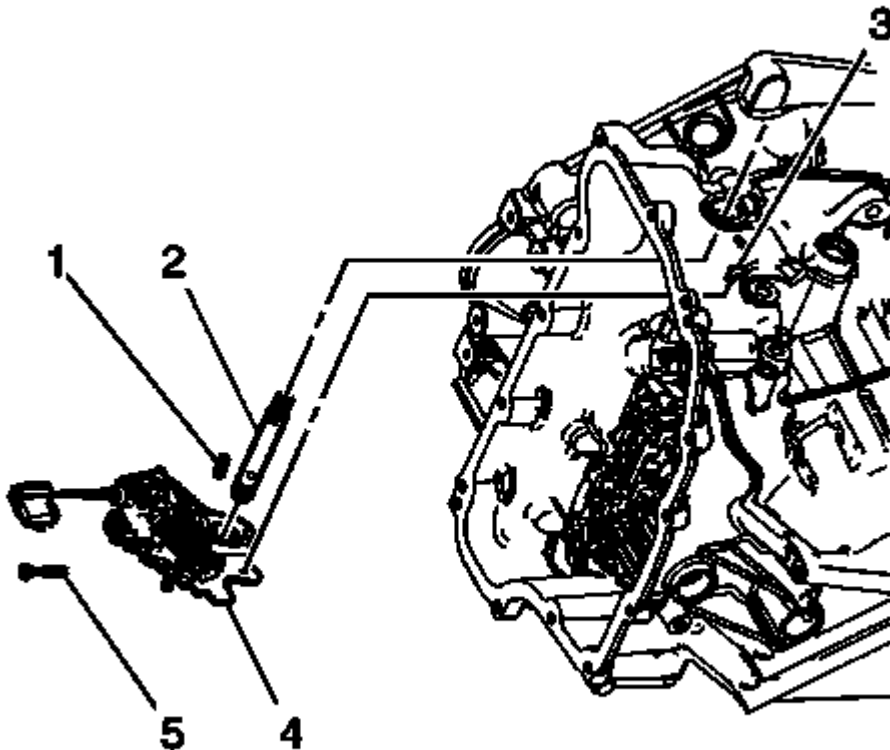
View Of Manual Shift Detent Lever & Shaft Position Switch Assembly
